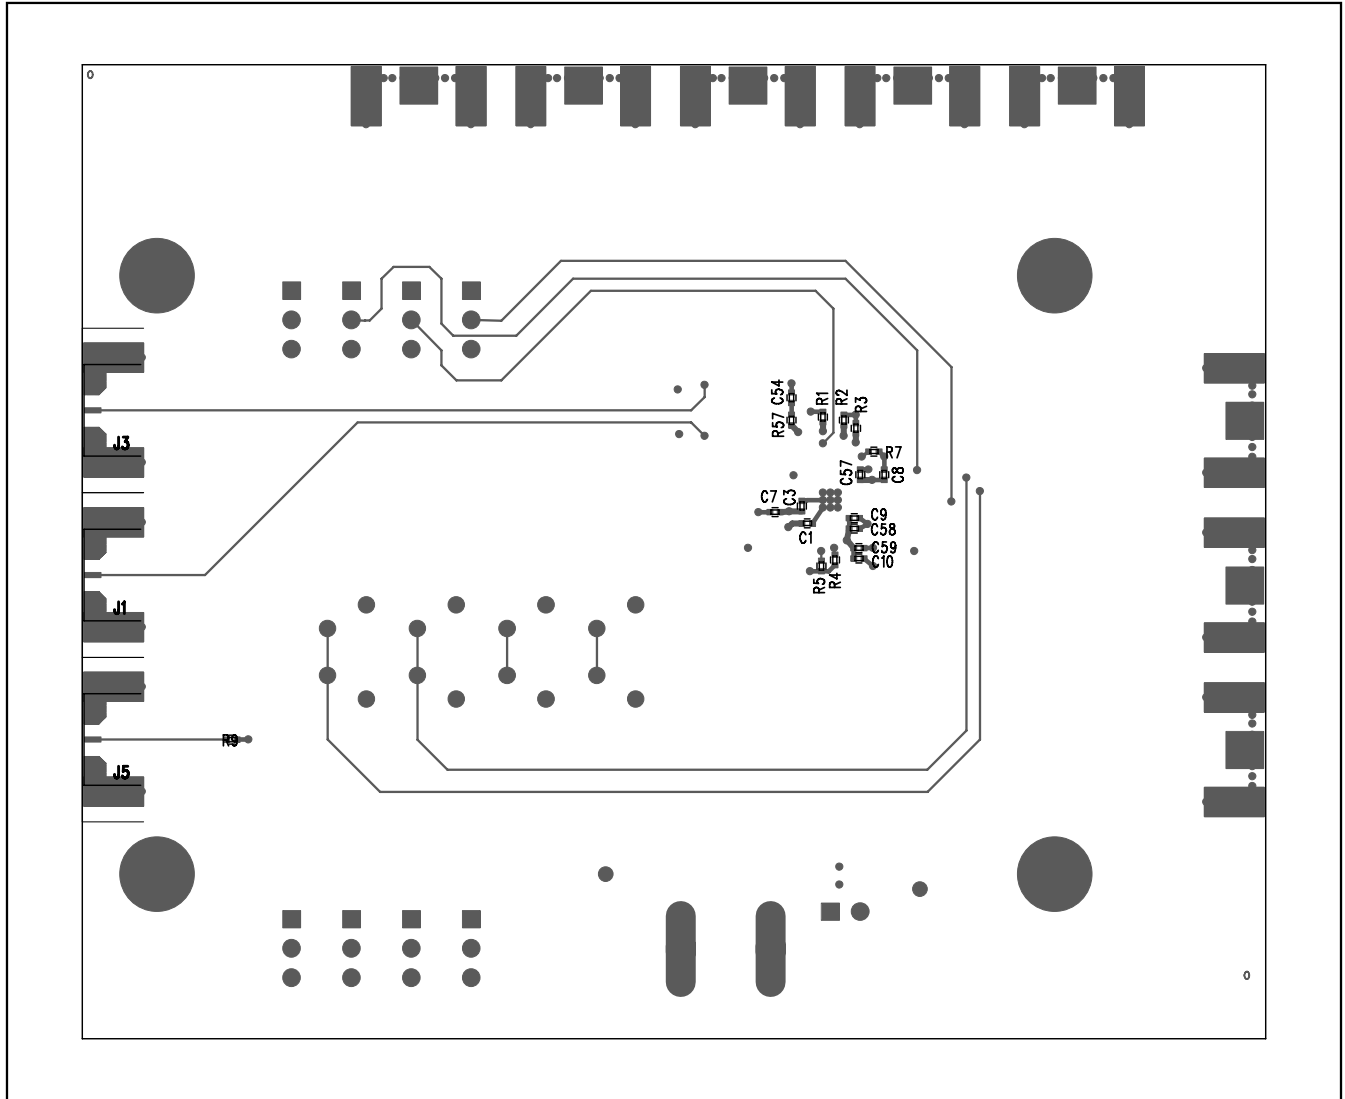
MAX3624 EV Kit Assembly Drawing—Bottom Side
